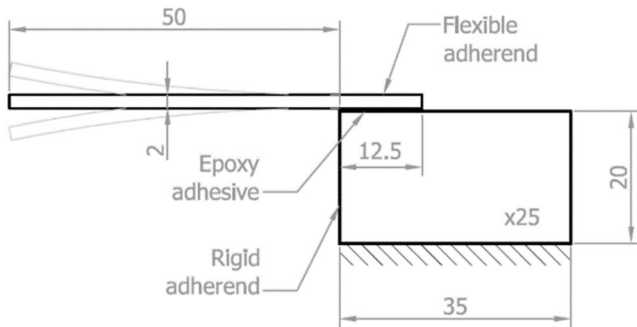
Shape and dimensions (in mm) of adhesive joint samples used in fatigue tests
